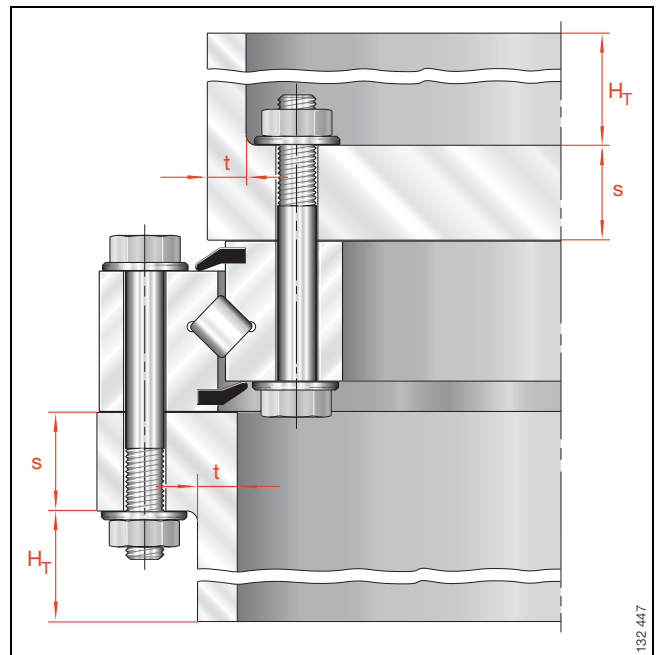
· Crossed roller bearing XSU between upper and lower adjacent construction
